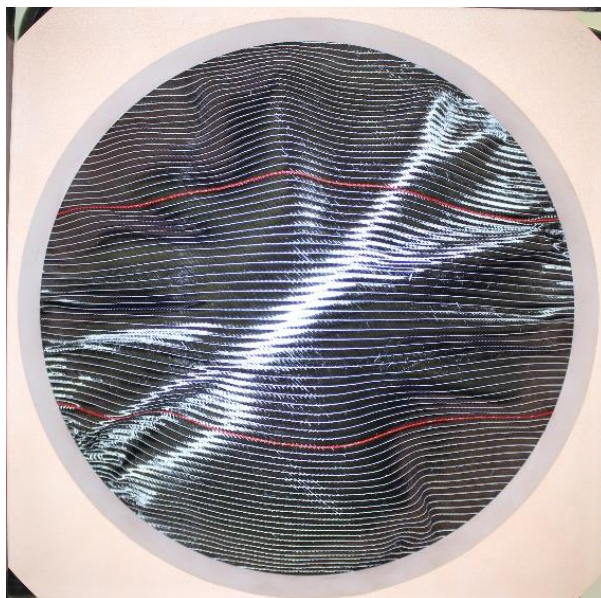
Photograph of deformed heavy triaxial fabric blank and surrounding supporting ring (of inner diameter 287 mm).
